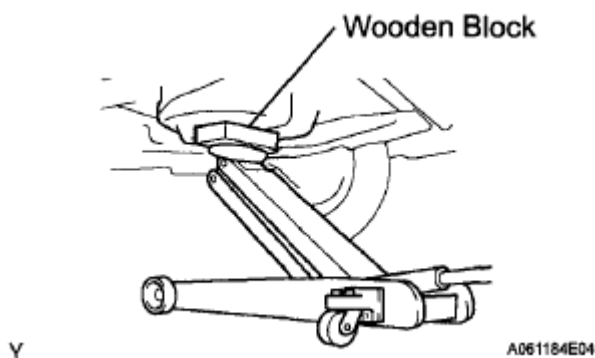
Placing Wooden Block Between Floor Jack And Engine
